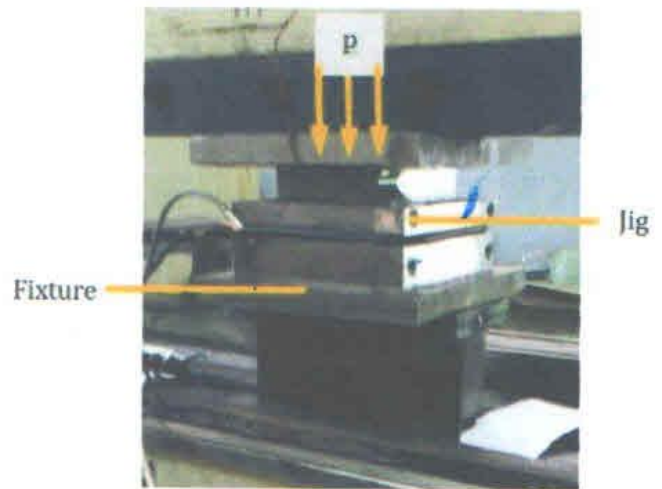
Jig and fixture for plate product of palm slag composites under investigation
